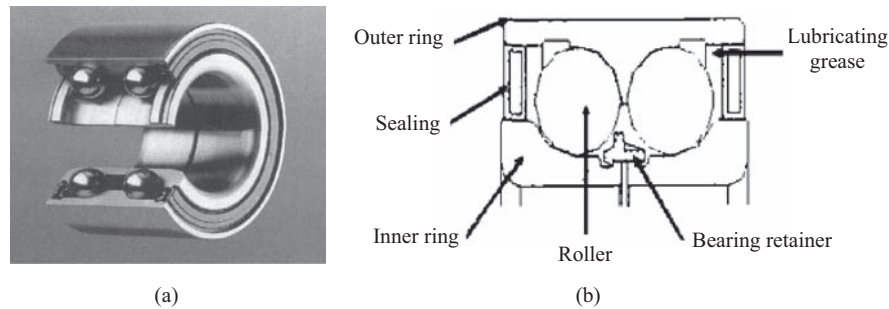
Typical front-wheel hub bearing: double-row angular contact ball bearing.
